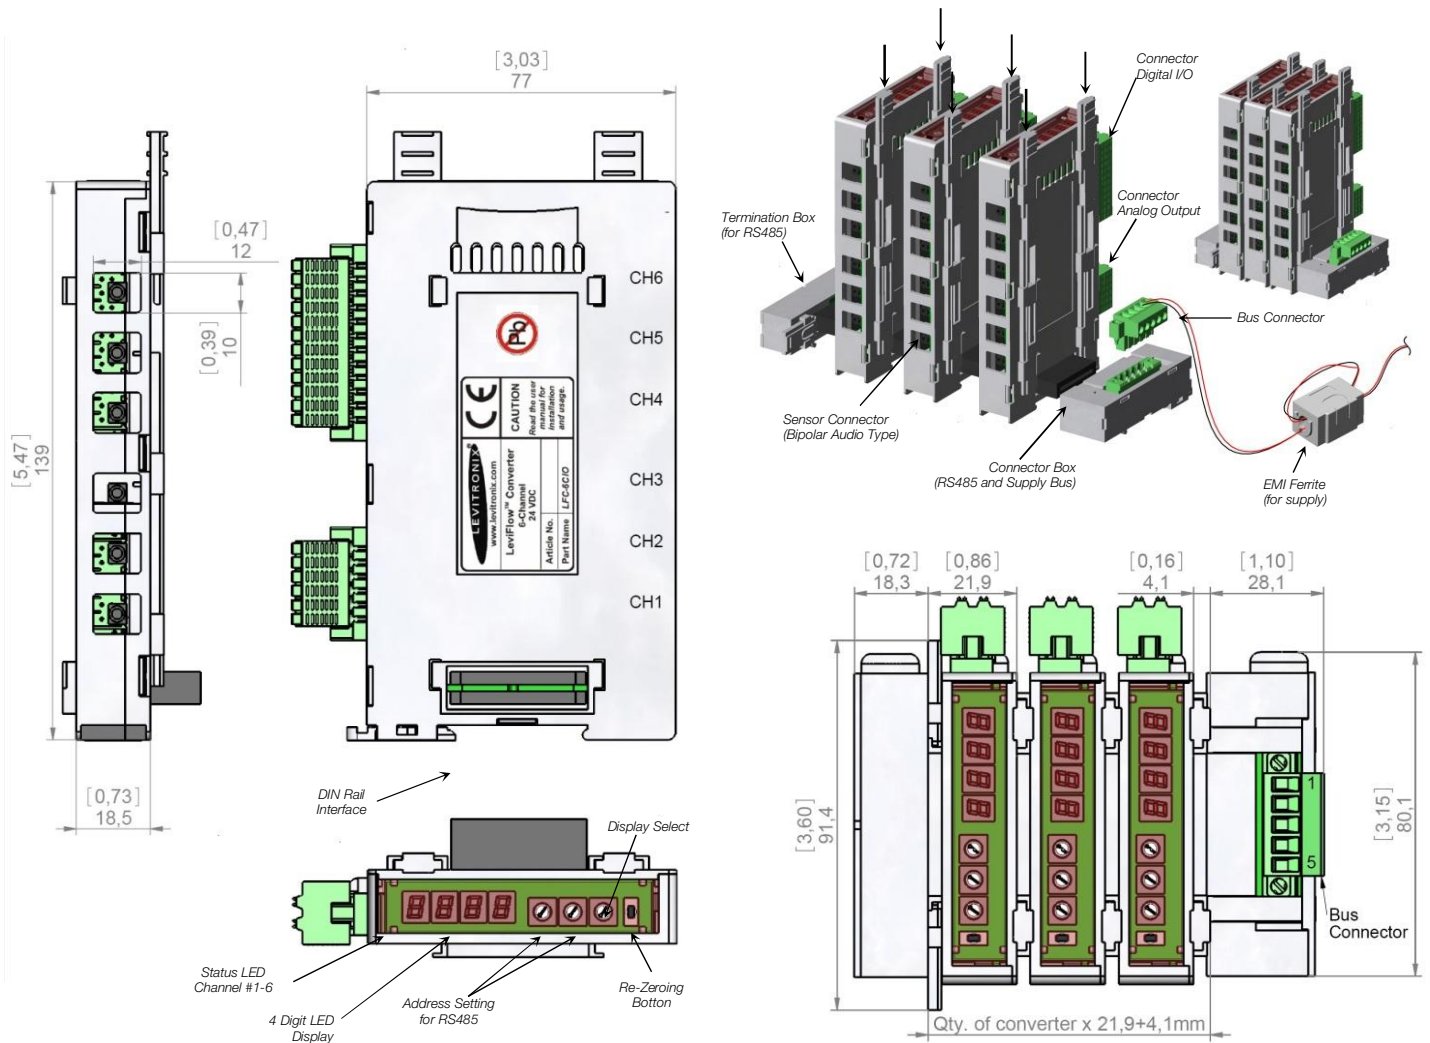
Dimensions, mounting and stacking concept of LFC-6CIO
